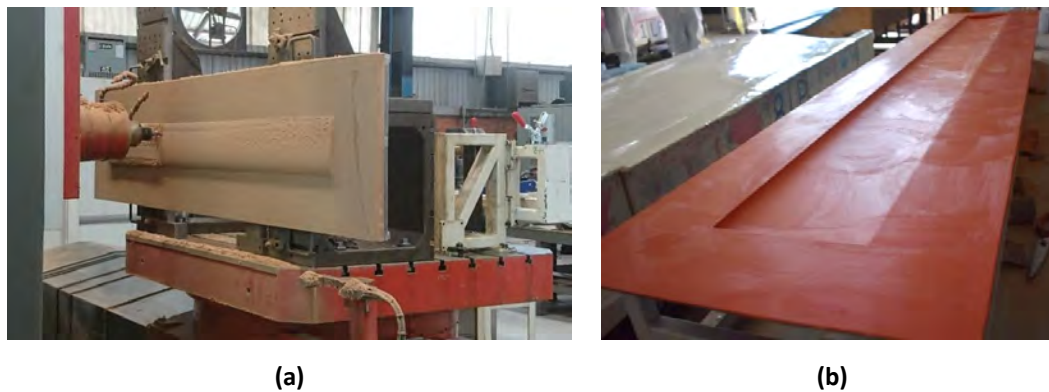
(a) Master plug machined with CNC machine, and (b) Mold for 1 kW VAWT blade.
